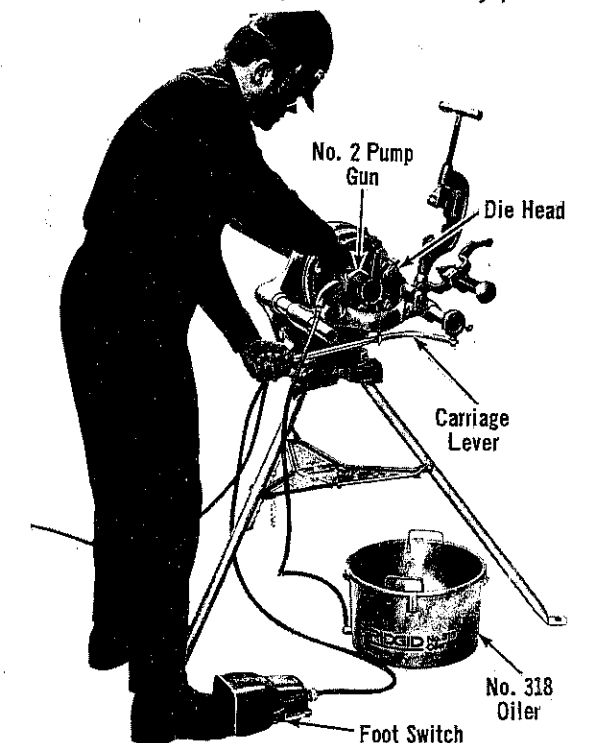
Threading Pipe with Quick or Self-Opening Die Head.
